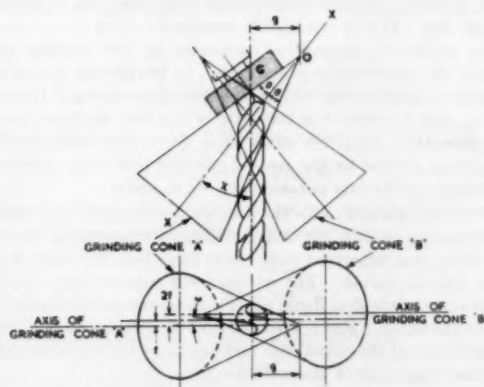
PRINCIPLE OF CONICAL GRINDING OF DRILL FLANKS
